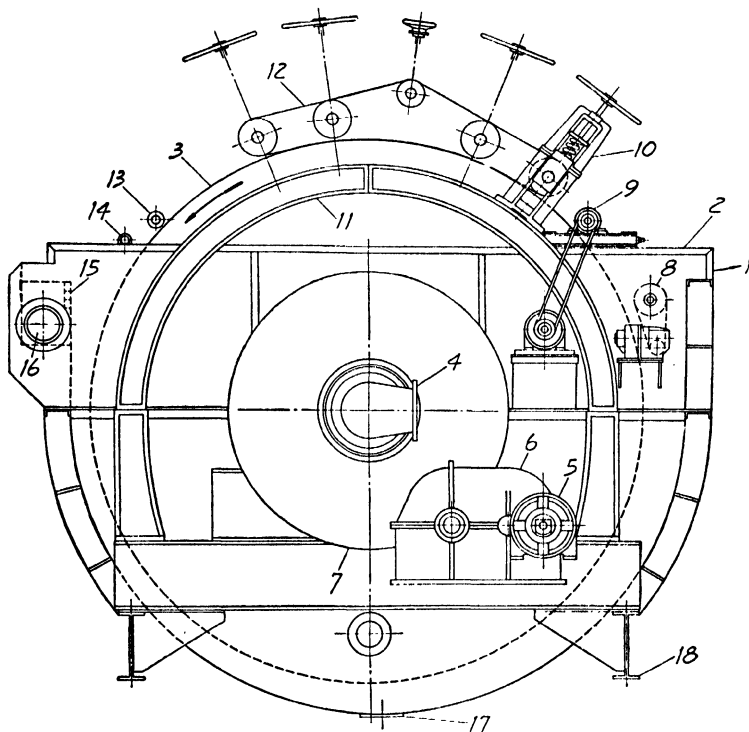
1, feed side from a suitable headbox; 2, board-machine tank; 3, board-machine drum, revolving in direction indicated by arrow; 4, vacuum connections for filtrate outlet, one on either side of drum; 5, drum drive motor, variable-speed direct-current type; 6, speed-reduction unit; 7, housing over bull-gear on drum trunnion; 8, agitator (number required depends upon character of stock); 9, brush roll; 10, four spring-loaded press rolls; 11, support for press rolls; 12, felt; 13, discharge roll with positive drive (not shown); 14, stationary shower; 15, adjustable overflow weir; 16, overflow connections, one at either end; 17, drain connection for tank; 18, supports for board machine.
